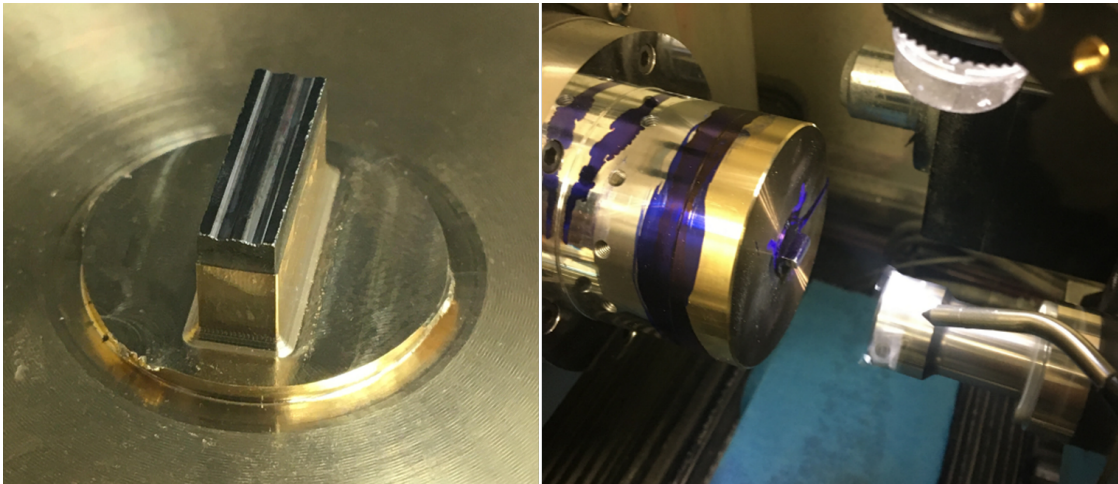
(left) Extended boss for lateral trimming; (right) flycutting arrangement.
